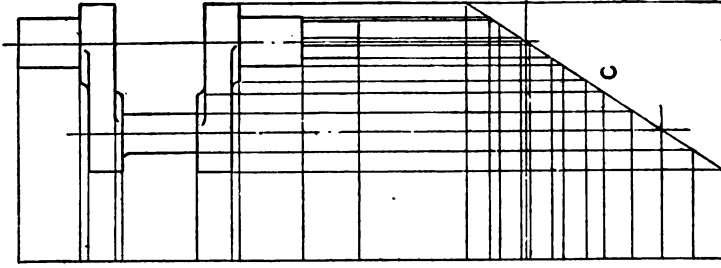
Obtaining a Left-Hand View from a Right-Hand Drawing.
